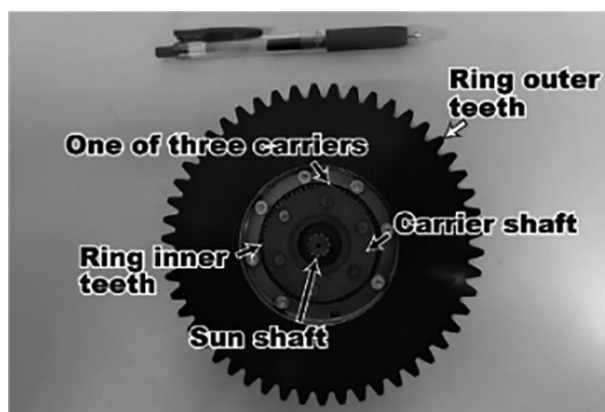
External appearance of the planetary gear mechanism used in the experiment.
